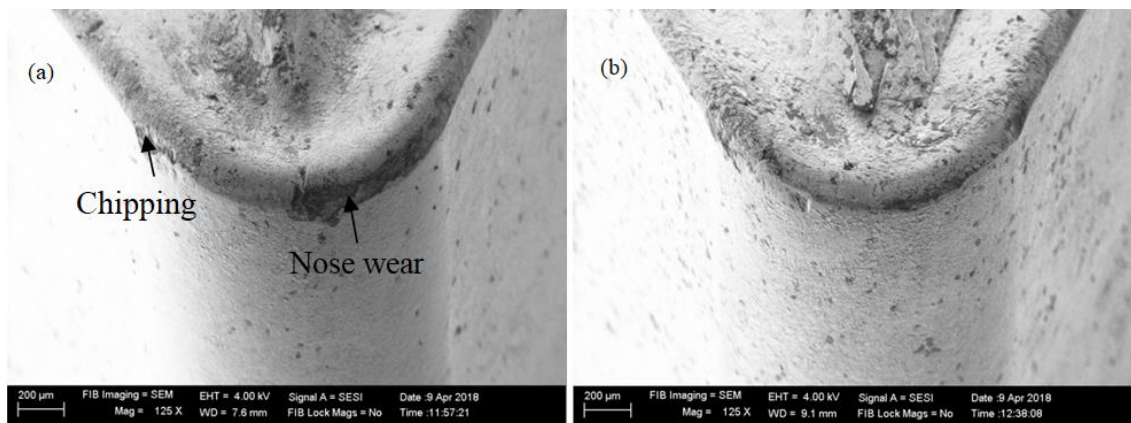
Microscopic image of wear observed at cutting speed 100m/min, depth of cut 0.5mm and feed rate 0.1mm/rev for(a) untreated cutting tool insert and (b) cryogenic treated cutting tool insert.
